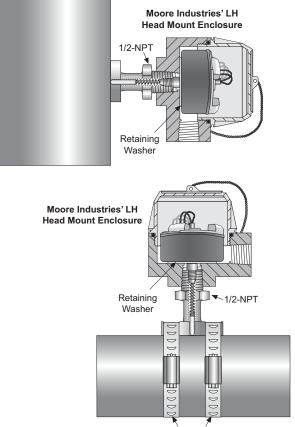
TANK option with connection head assembly and PIPE option with connection head assembly.
